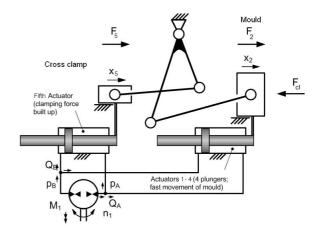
Diagram of the clamping unit of the injection machineRys. 1. Schemat mechanizmu zamykającego formę maszyny wtryskowej
